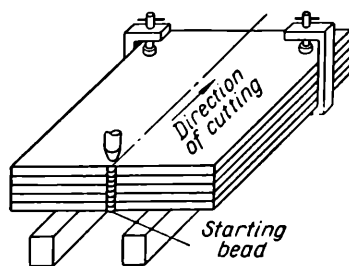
A stack of plates held together by cramps, with a bead deposited facilitate cut starting
